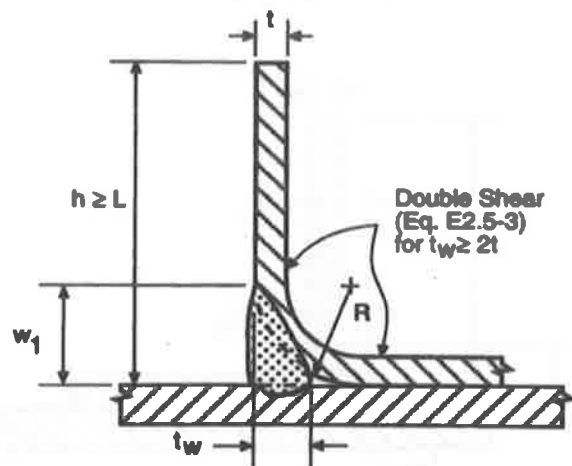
Flare Bevel Groove Weld (Filled flush to surface, $w_1 = R$)
